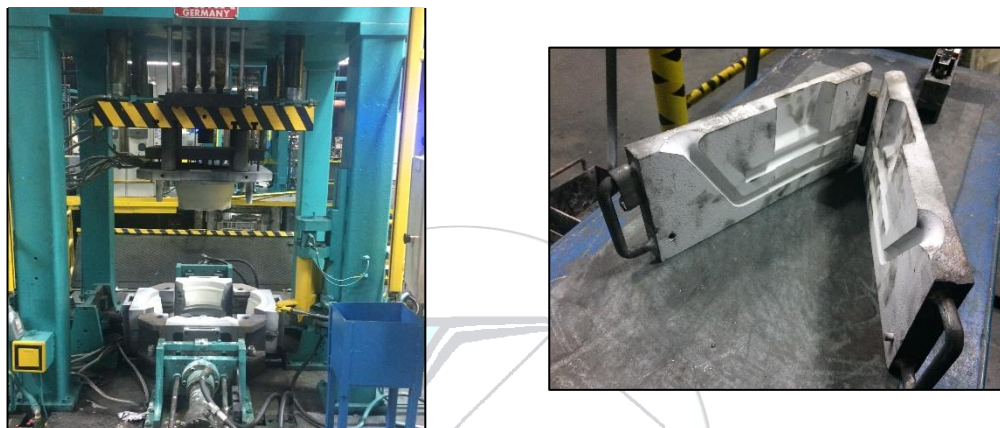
(a) LPDC (Low Pressure Die Casting) method (b) Permanent mold for tensile specimen
